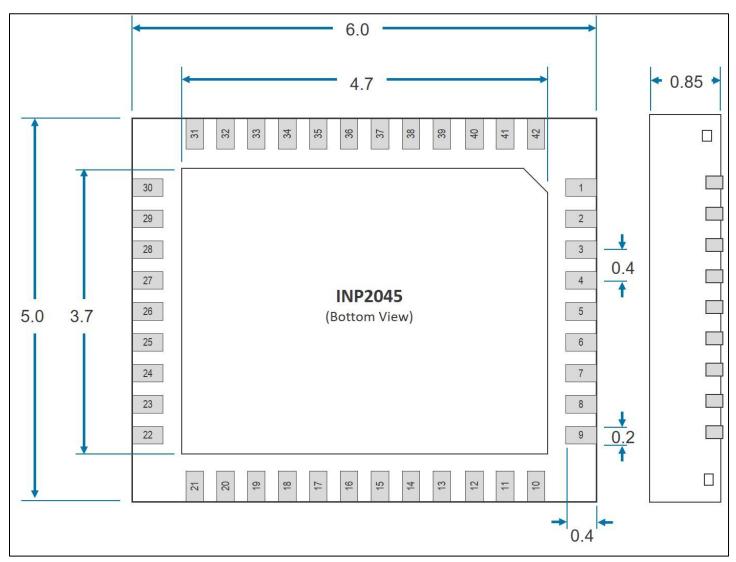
INP2045 SoC Chip Pin Out and Dimensions
